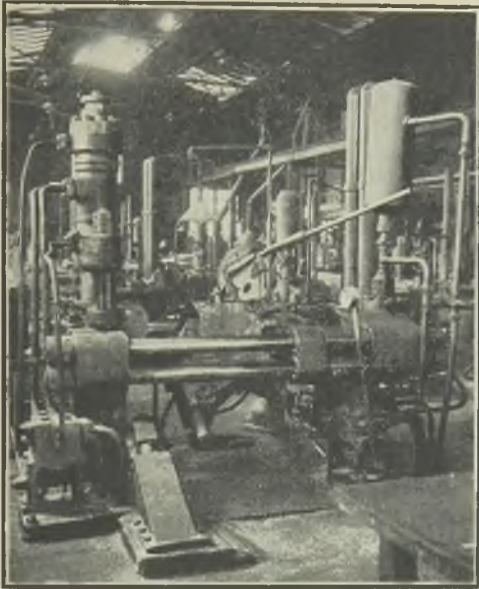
LARGE HYDRAULIC DIE-CASTING MACHINE WITH AIR REINFORCEMENT CAPABLE OF EXERTING PRESSURE OF 350 TONS.
